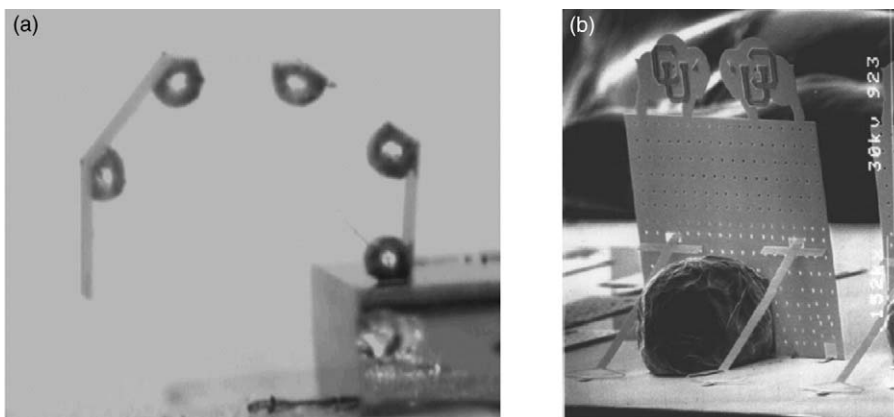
Optical graphs of some 3D self-assembled structures by reflowed solder: (a) 5-bar multiple link assembly. (Photo courtesy: Harsh K F, Kladitis P E, Zhang Y H, Dunn M L, Bright V M, Lee Y C 2000 Tolerance and precision study for solder self-assembled MEMS. *Proc. SPIE* 4075, 173–84.) (b) A flap vertically assembled. (Photo courtesy: Kladitis P E, Bright V M 2000 Prototype microrobots for micro-positioning and micro-unmanned vehicles. *Sens. Actuators* A80, 132–7.)
